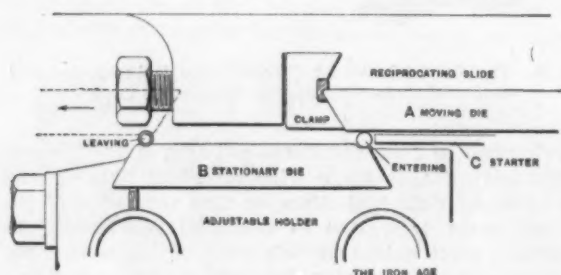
Detail of the Working Parts in the Automatic Feed Thread Roller.
